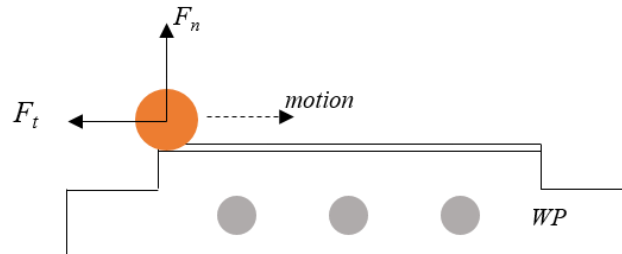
The top view of the workpiece (WP), tool and the normal and tangential forces.
